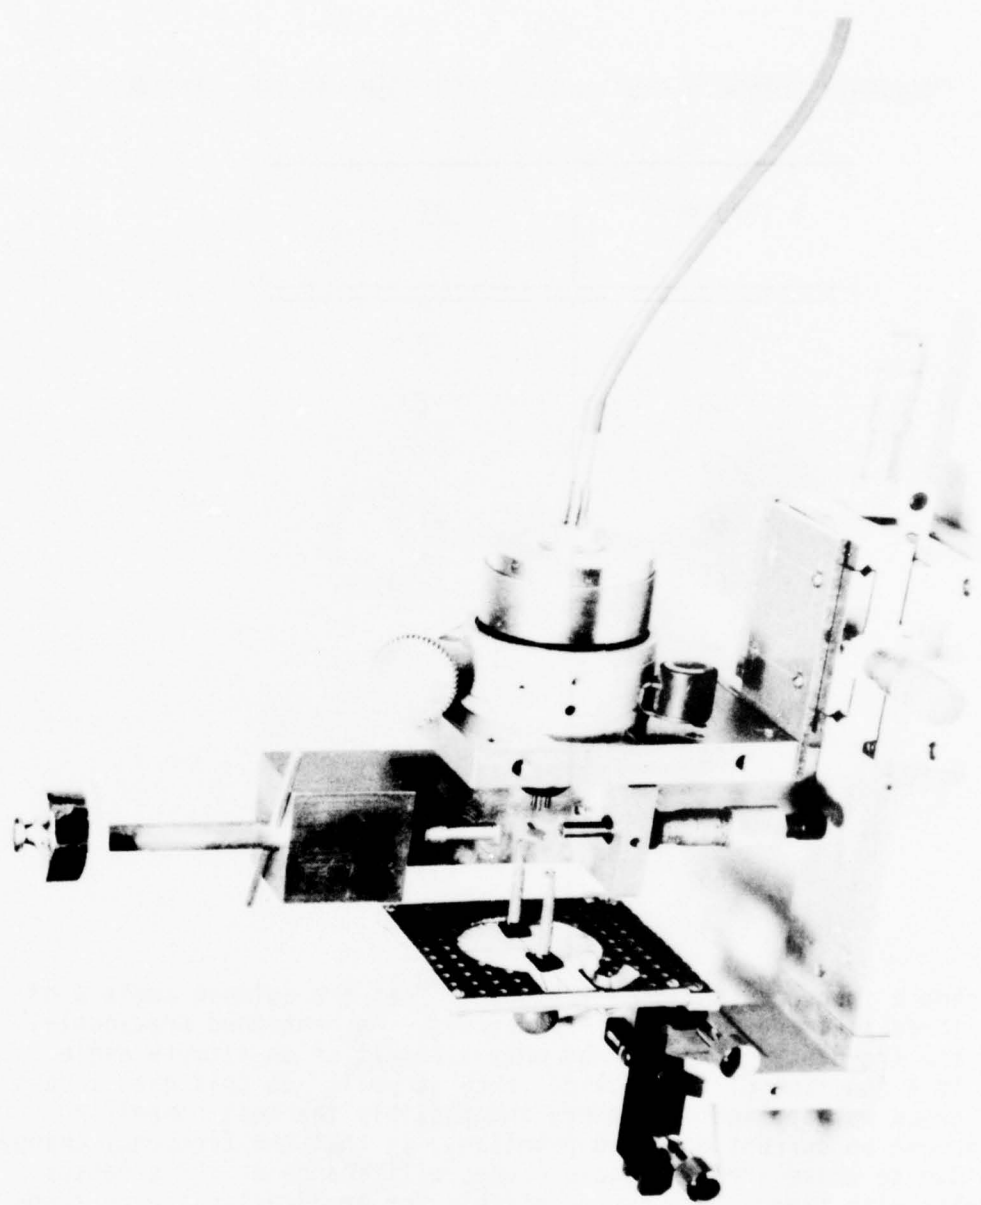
MOUNTING JIG, RIGHT VIEW.
